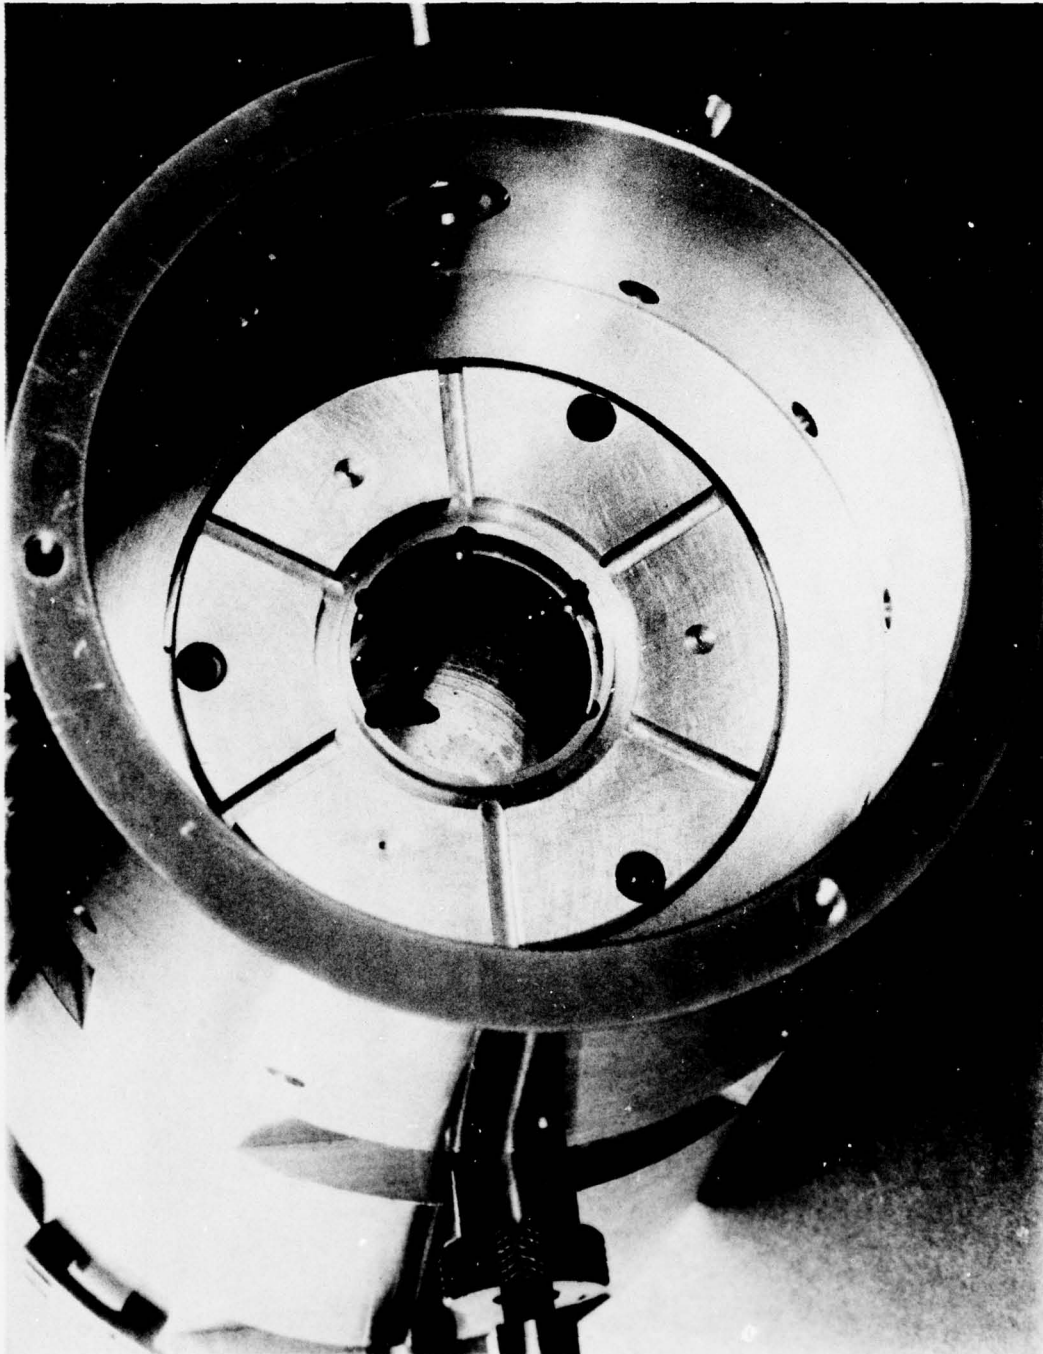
VIEW OF HOUSING AND AIR BEARING
